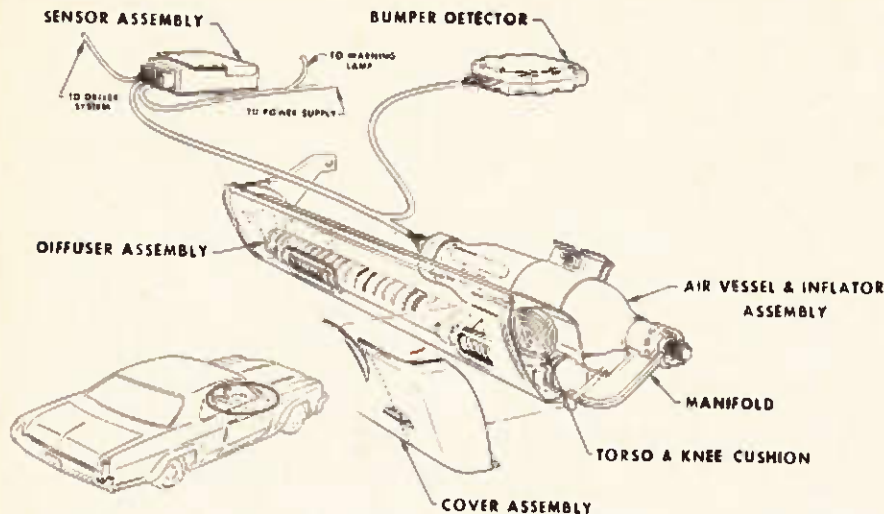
Accelerometers mounted in the bumper and on the fire wall are used to trigger the developmental air bag of GM.
